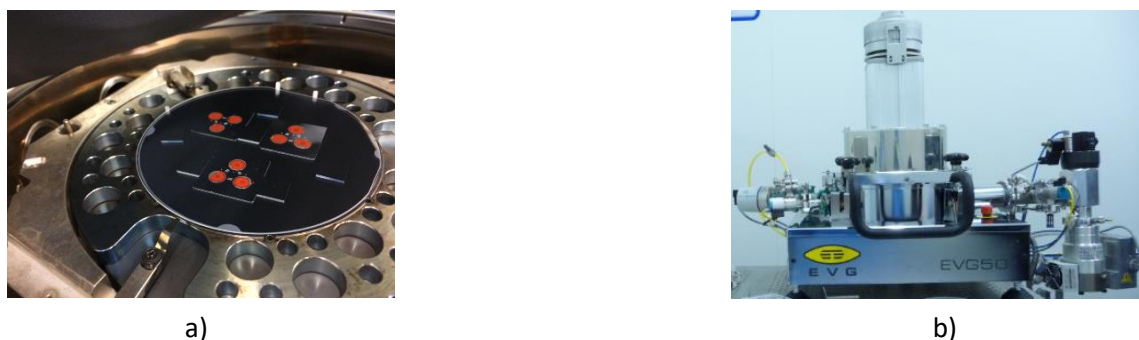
a) Membrane samples placed inside the chamber. b) Complete view of the welding machine type EVG501
